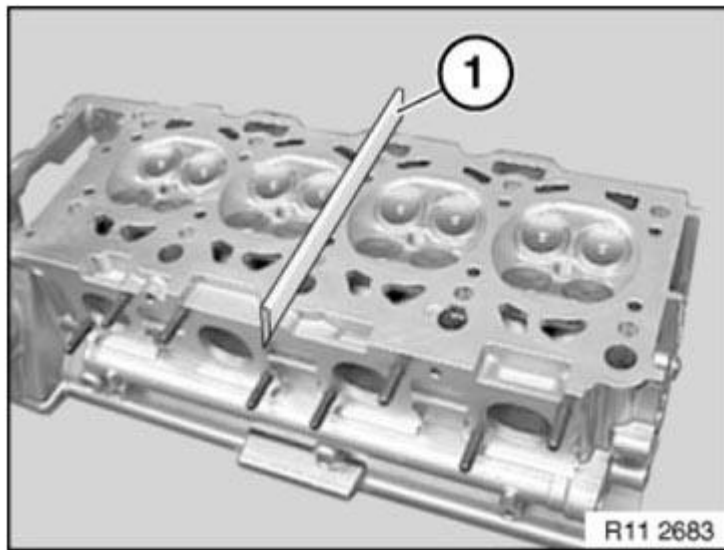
Checking Evenness Of Cylinder Head Lower Face With Standard Straightedge - Transversal
